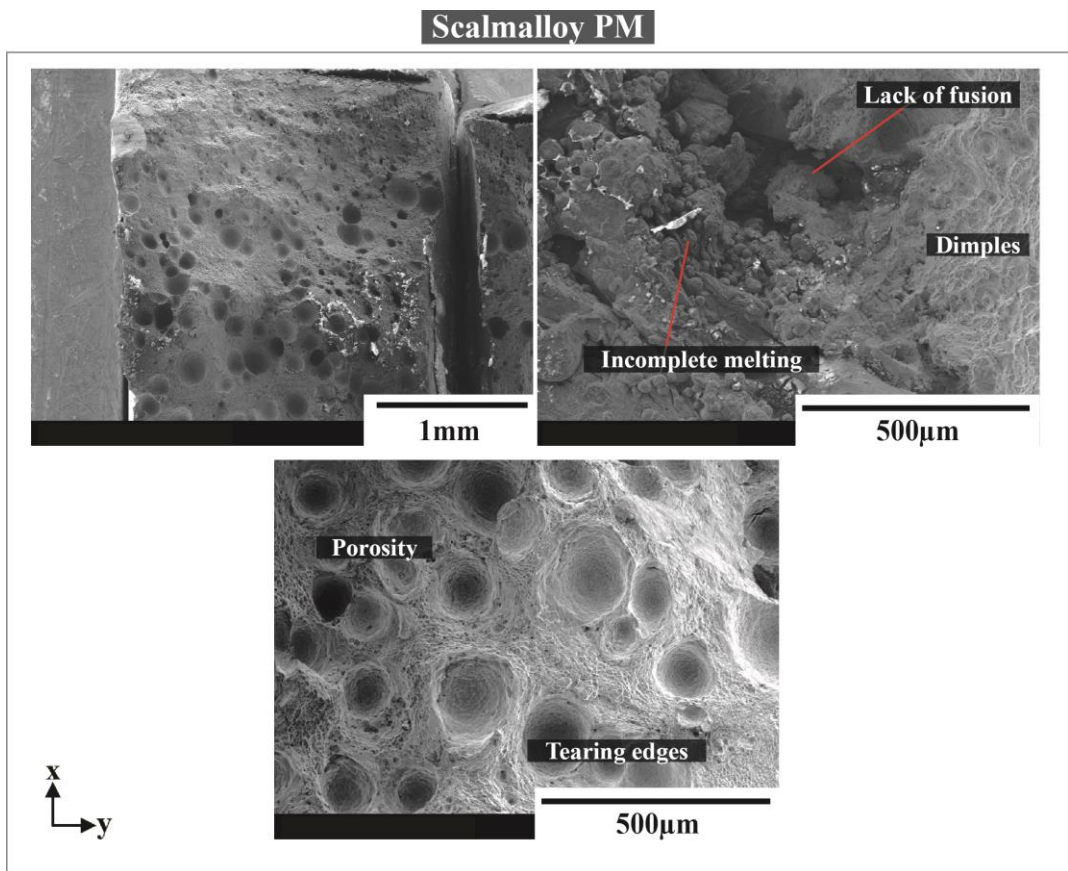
Fracture surfaces and fractured samples for Scalmalloy-5052Al post machined welded joint
